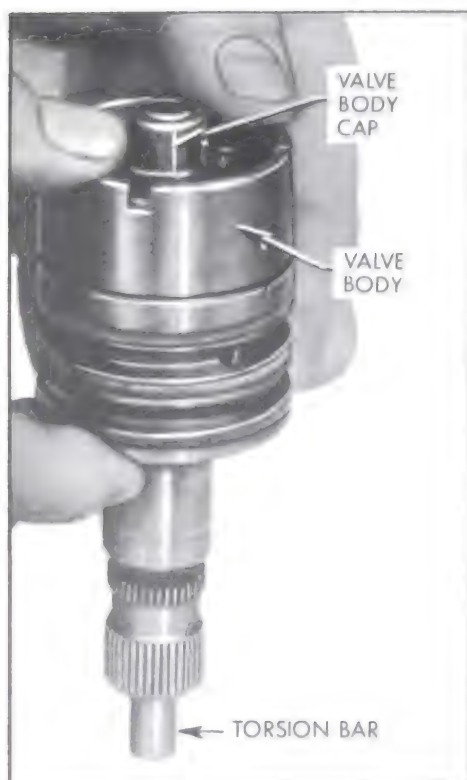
Removing Stub Shaft, Torsion Bar and Cap Assembly From Valve Body
